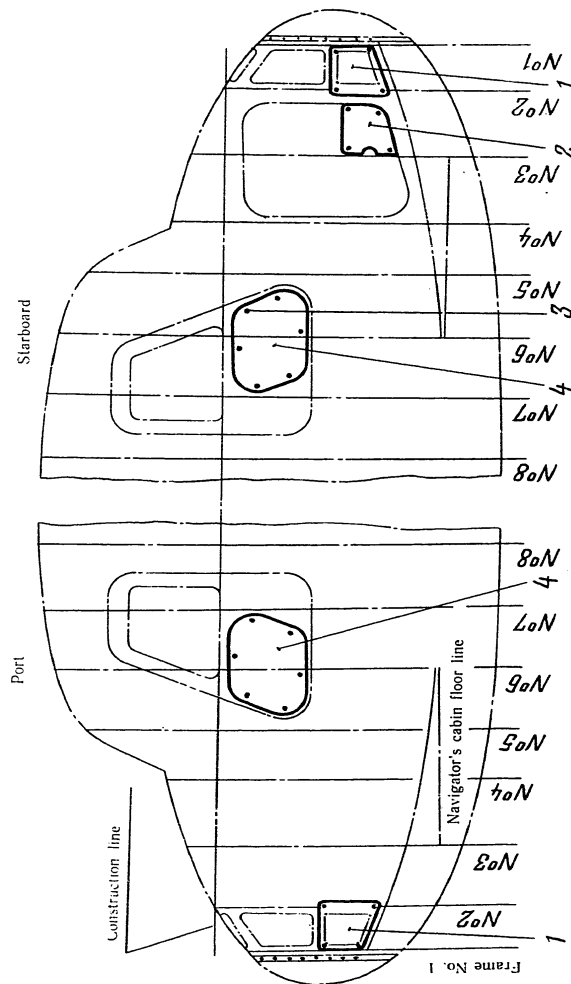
Outside Arrangement of Armour Plates on Walls of Navigator's and Pilots' Cabins
